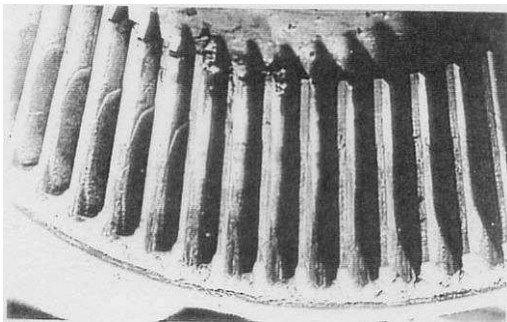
Photograph of fretting corrosion [83]
